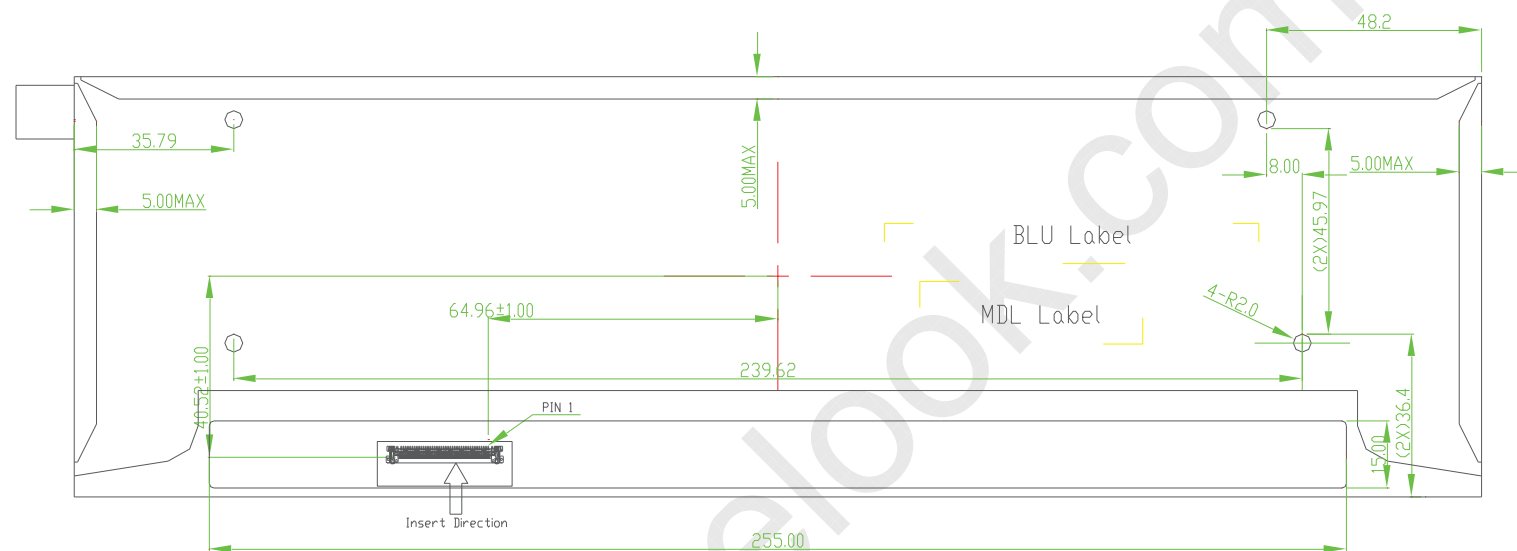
TFT-LCD Module Outline Dimensions (Rear view)
